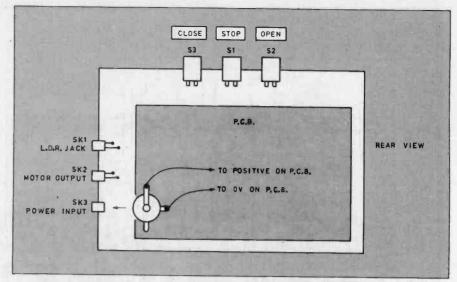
Positioning the printed circuit board "off-centre" allows space for the l.e.d.s, switches and sockets.
